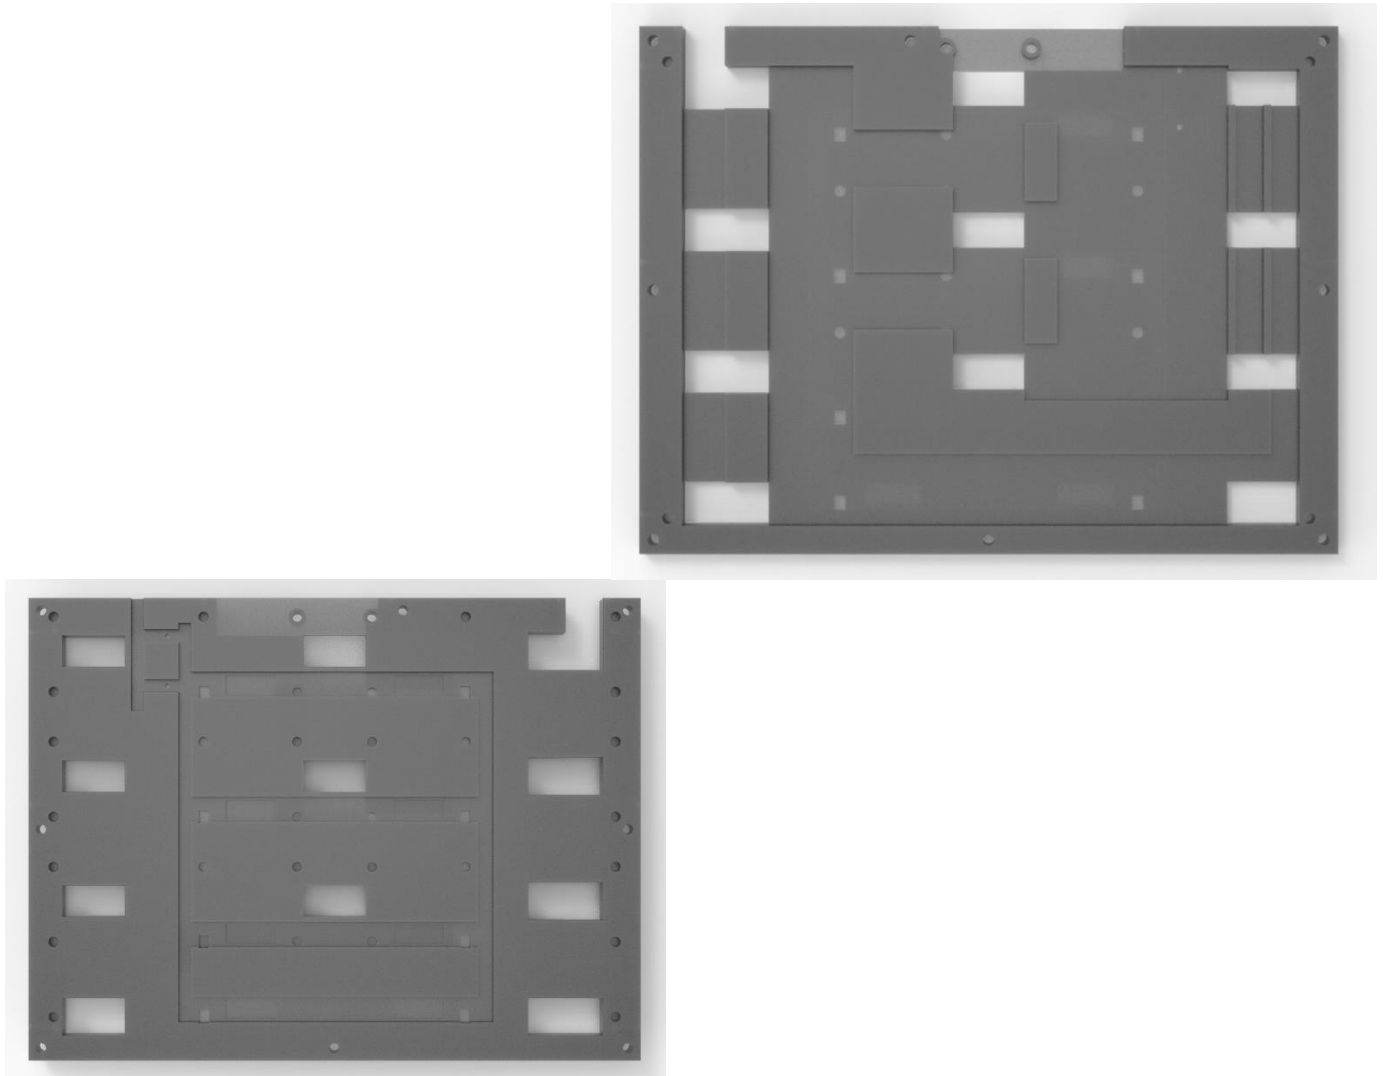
Top view (Left) Bottom View (Right) of the Base, with all slots and holes machined in.
